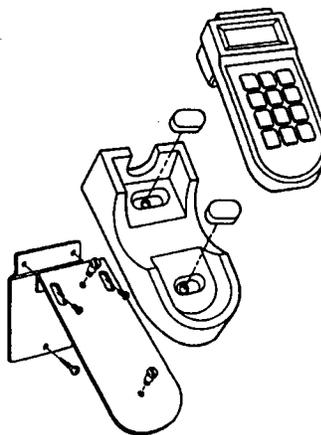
PINpad 101 Unit Mount Components (Exploded View)
